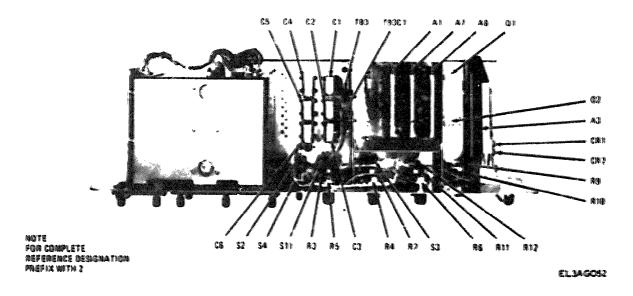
Test Set Subassembly MX-8639A/APS-94D, Unit 2, bottom chassis new, parts location
